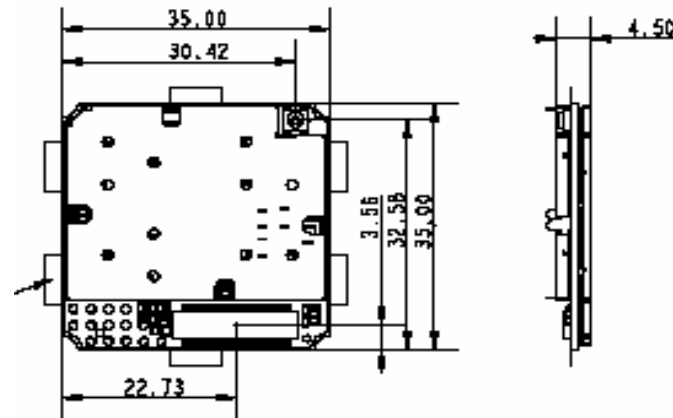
Mechanical dimensions of SIM5210 (Unit: mm)
